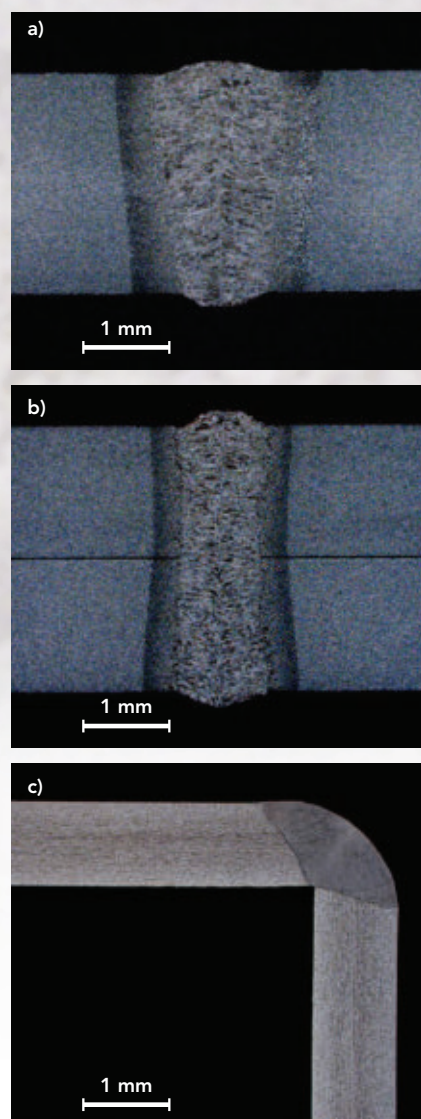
Examples of transverse sections of laser welds: a) butt joint, b) overlap joint, and c) corner joint.
